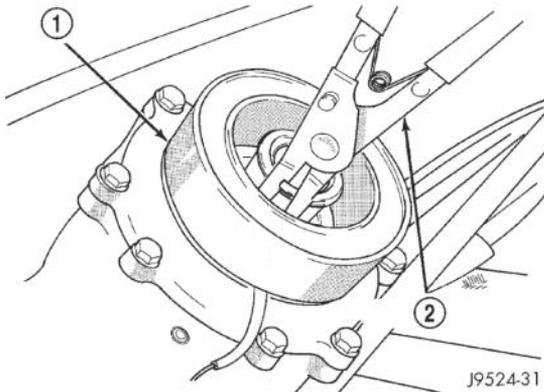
CLUTCH FIELD COIL SNAP RING REMOVE-typical
